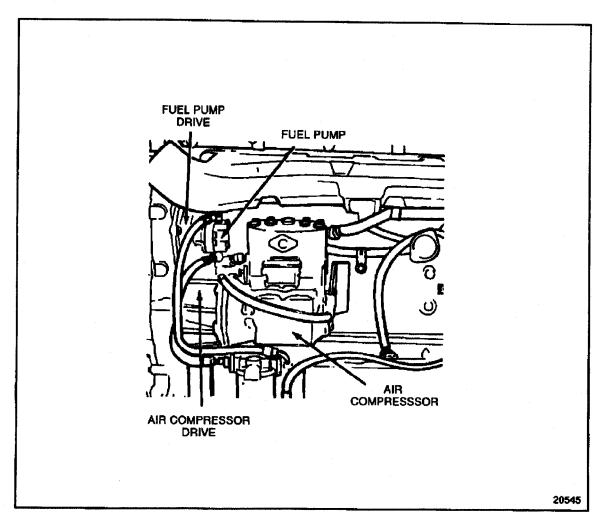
Original Air Compressor with Flange Mounted Fuel Pump
